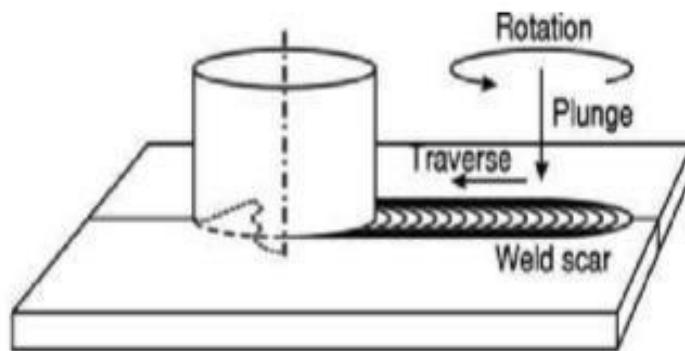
Schematic of Principle of Friction Stir Weld
